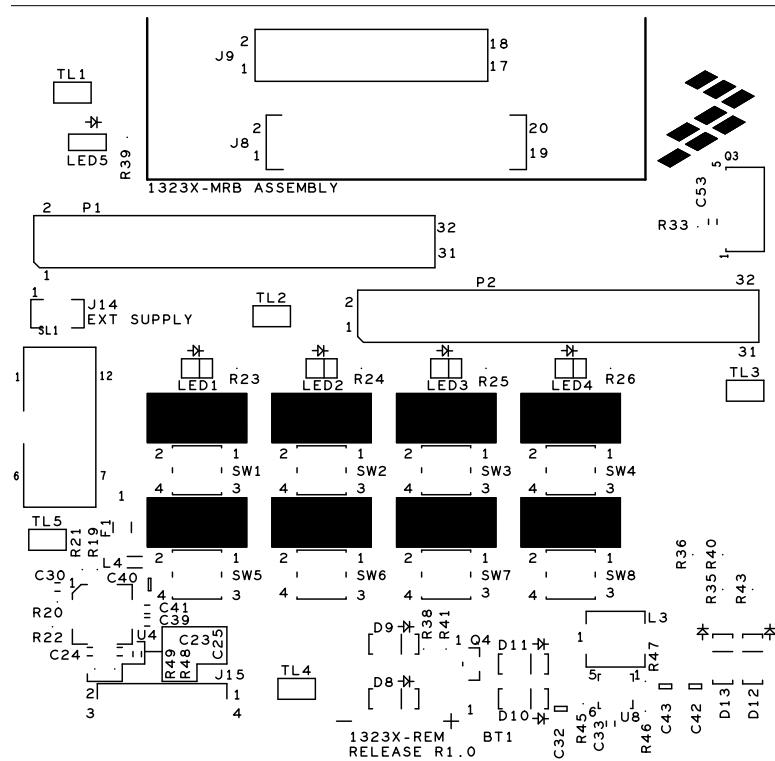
1323x-REM PCB Component Location (Top View)
